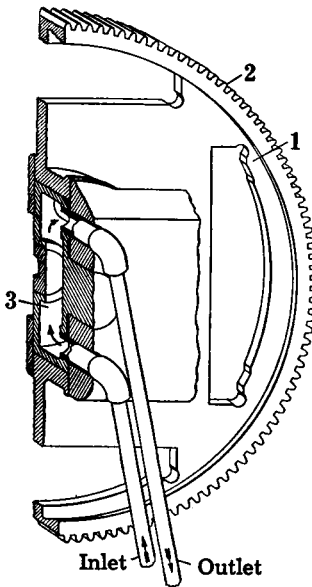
Diagram showing the water circulation system of the water-cooled mold disk.
